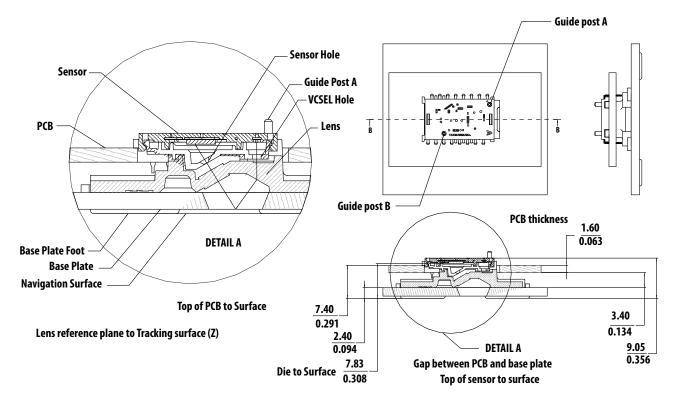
2D Assembly drawing of ADNS-7530 sensor coupled with the ADNS-6150 lens, PCB and base plate (top and cross-sectional view)
